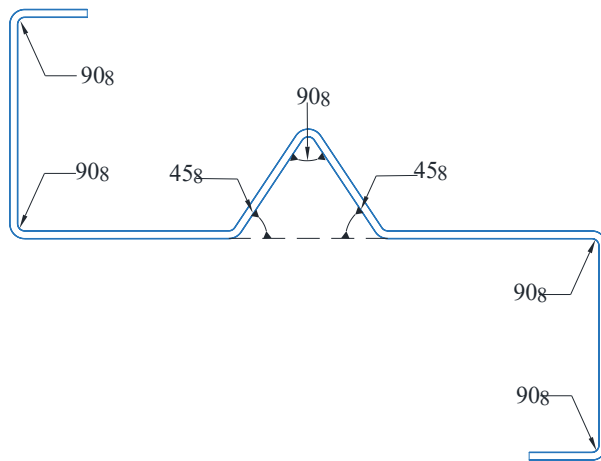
Final Z-section geometry with V-shaped web stiffener.
